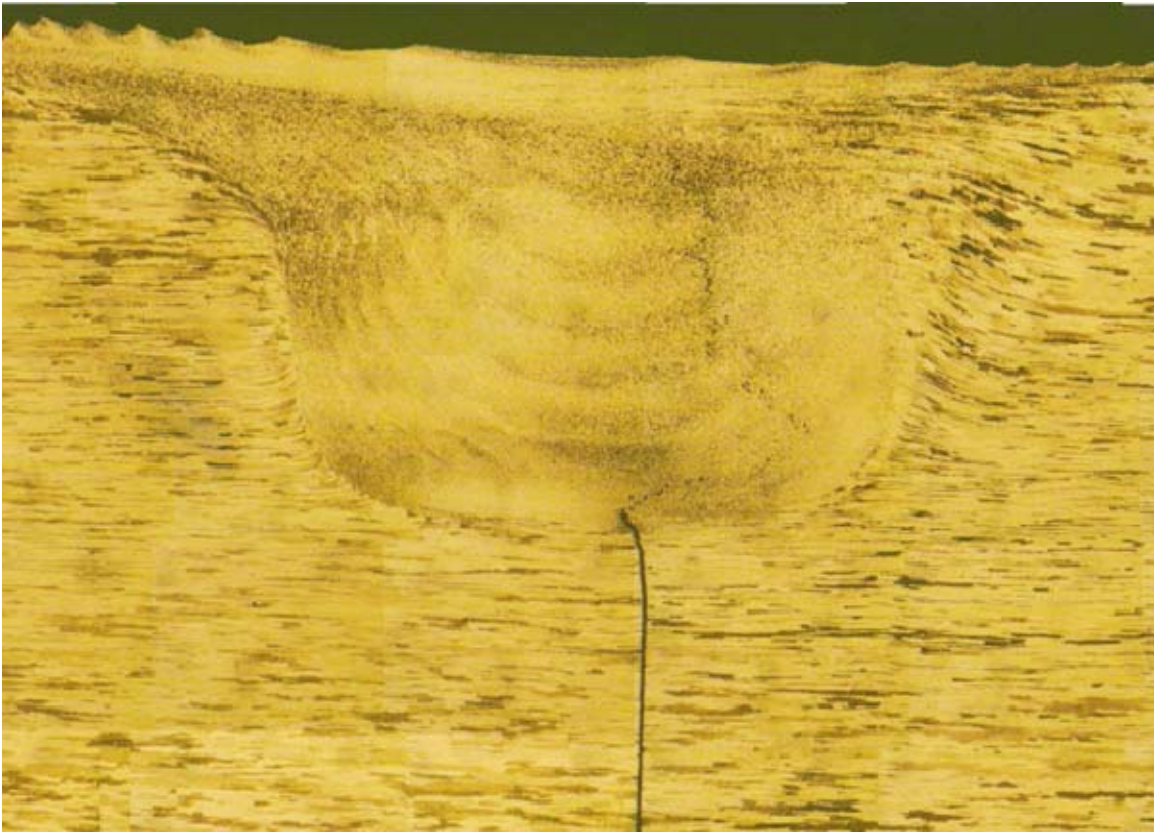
Transverse View of Anodized to Unanodized Al-Li alloy, centerline weld with Standard tool (sample 1076)
